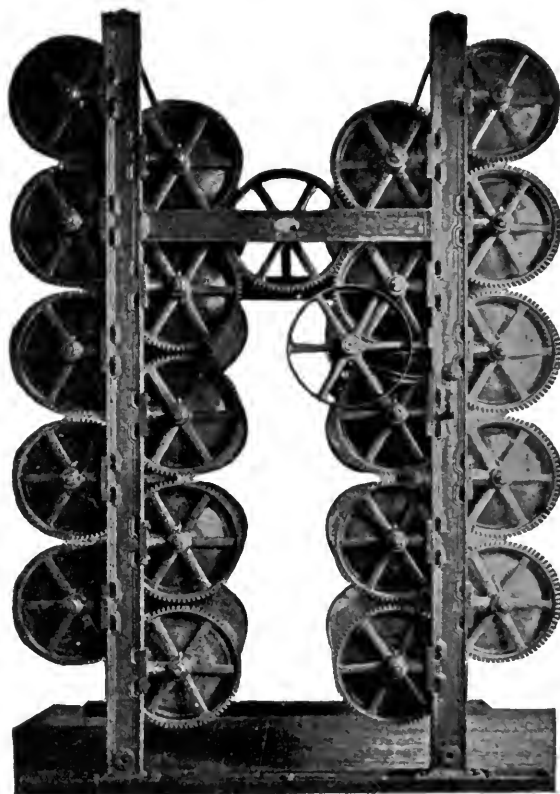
20-cylinder Upright Drying Machine. (H. W. Butterworth & Sons Co.)
